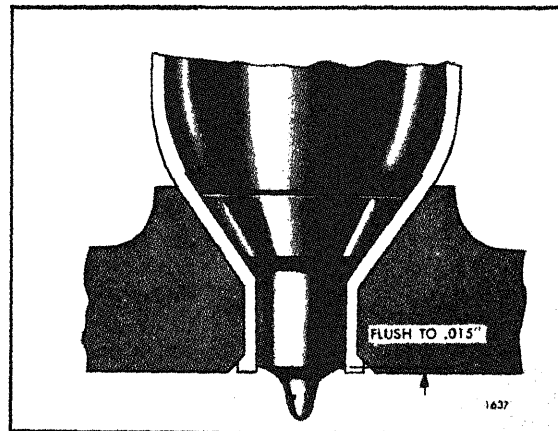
Checking Location of Injector Spray Tip Relative to Lower Surface of Cylinder Head
